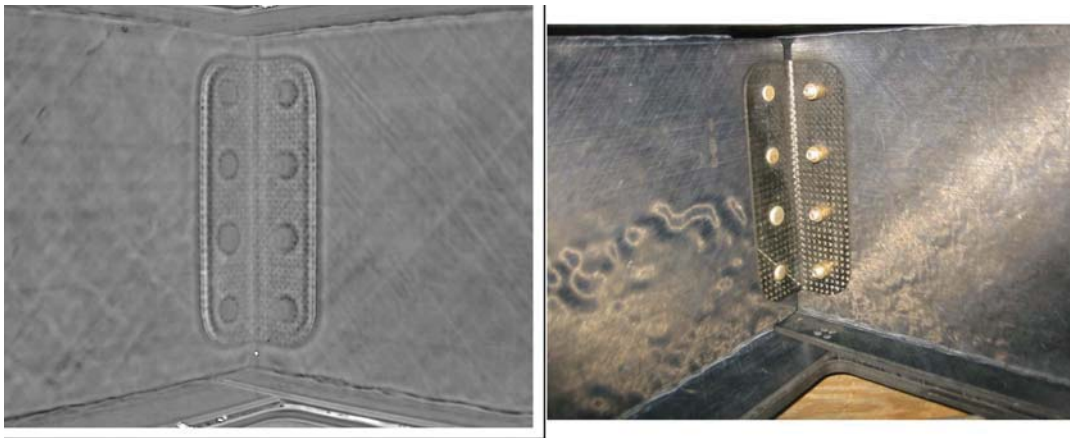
Thermal inspection results for cruciform 2, rivet 4.
